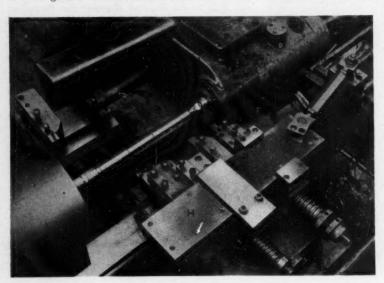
For Roughturning the Smallerdiameter End of the Shaft, Another Lo-Swing Lathe is Employed with this Set-up which Incorporates Two Cam-operated Tools on the Front Slide and Form Tools at the Rear
